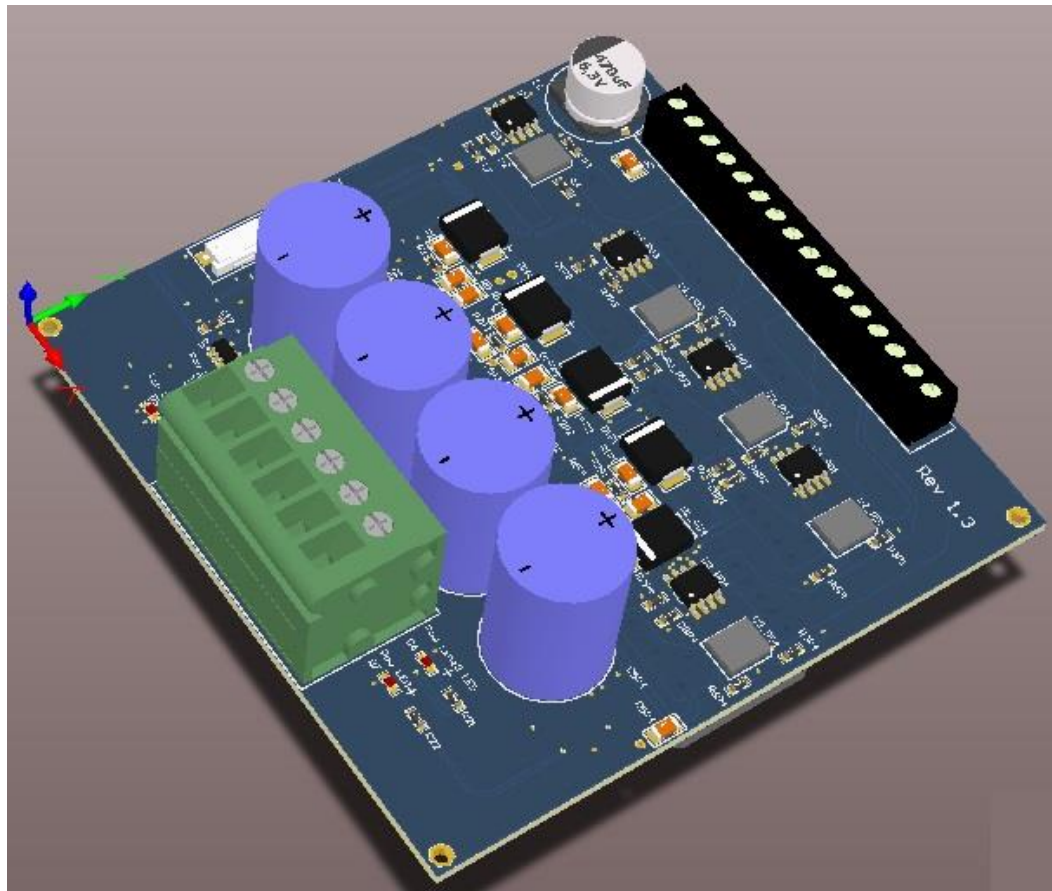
3D Model Side view of 1C601 Power Driver Board
